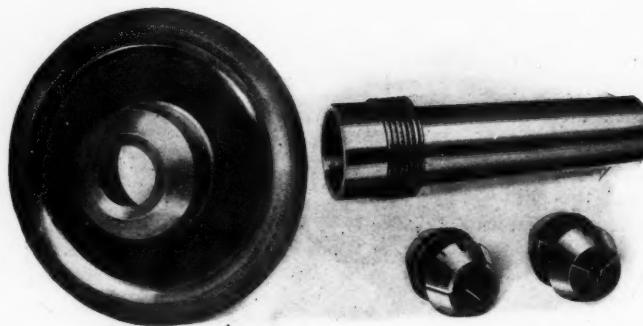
Parts of Collet Chuck made by Globe Engineering Co.
